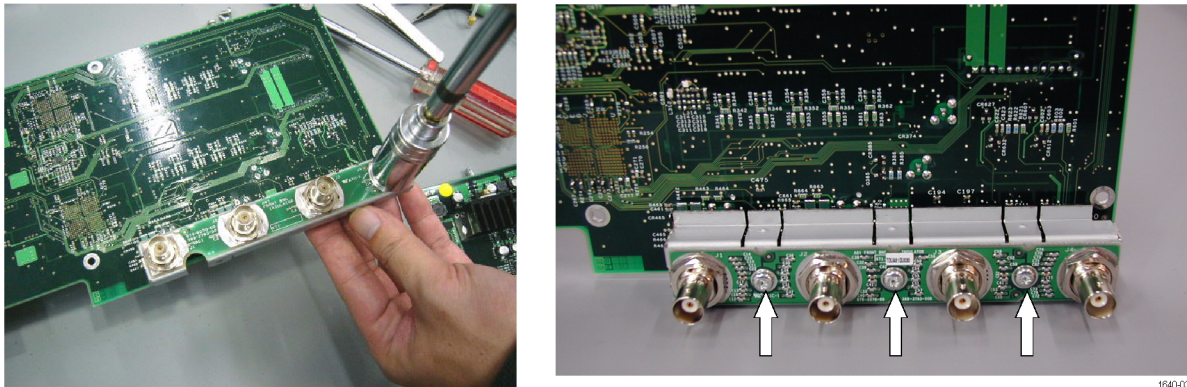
Removing the A81 BNC Insulator board and BNC bracket
